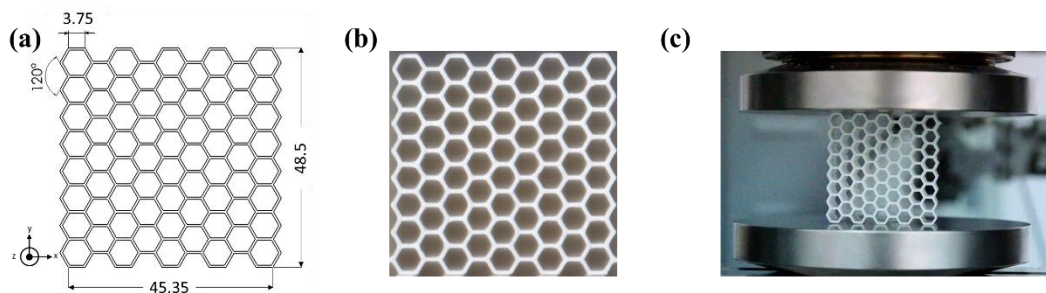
(a) Technical Drawing of Honeycomb Specimen. (b) A Photograph of Honeycomb Test Specimen. (c) A Photograph of Honeycomb Compression Test Setup.
